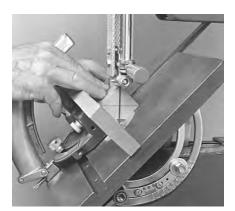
The miter gauge can be used to guide and support the stock when making bevel cuts.
